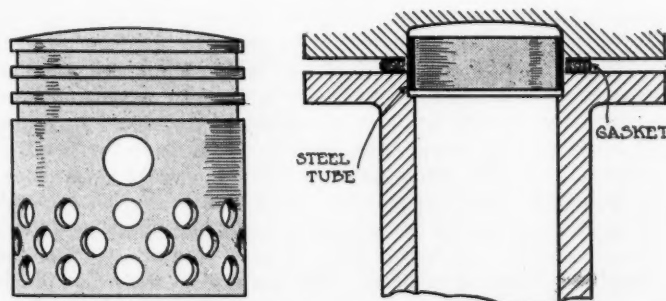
Left—Piston drilled to reduce weight and to prevent smoking. Fig. 2—Right—Illustrating the use of a ring of steel tube to protect gasket and also to form a spigot
